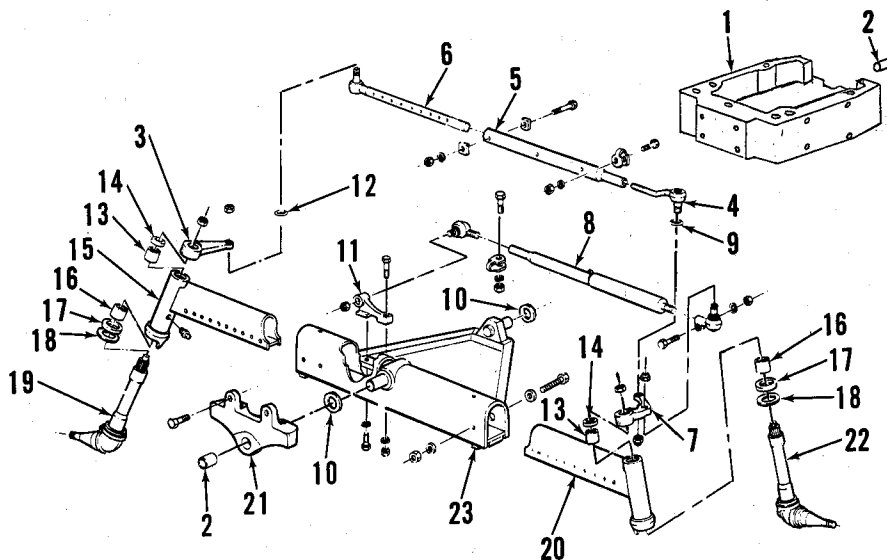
Exploded view of front axle assembly used on Models 8700, 9700, TW10, TW20 and TW30.
